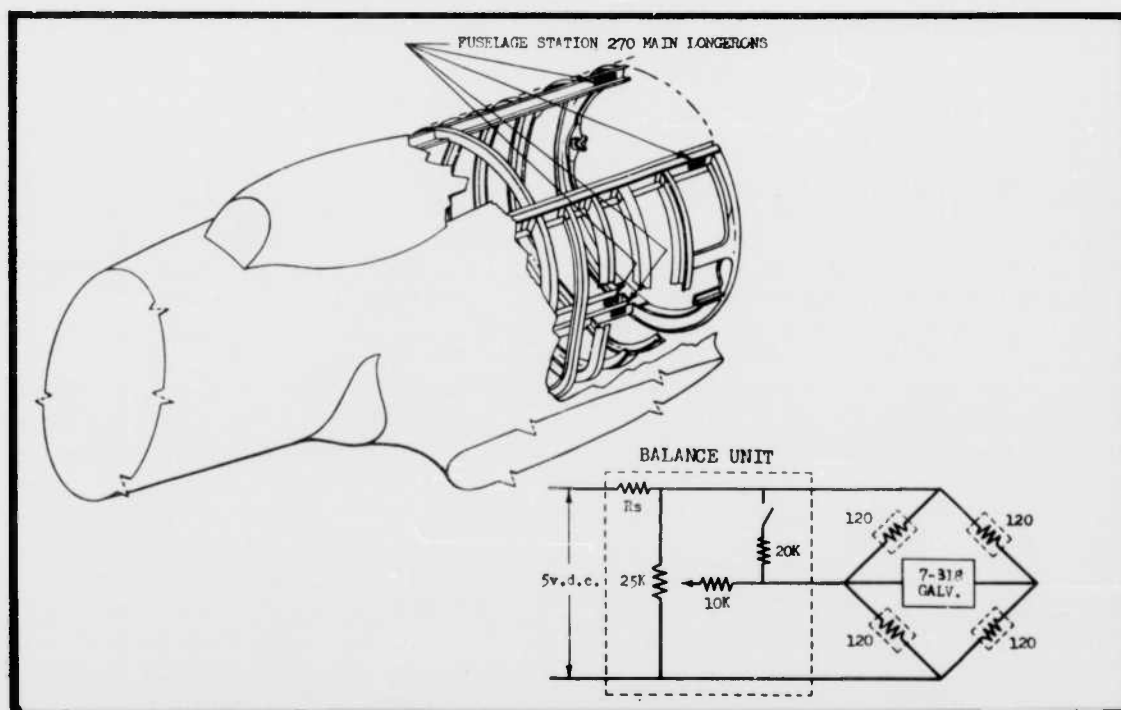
Typical Fuselage Bending Moment Bridge Installation (Four-Active-Arm)
